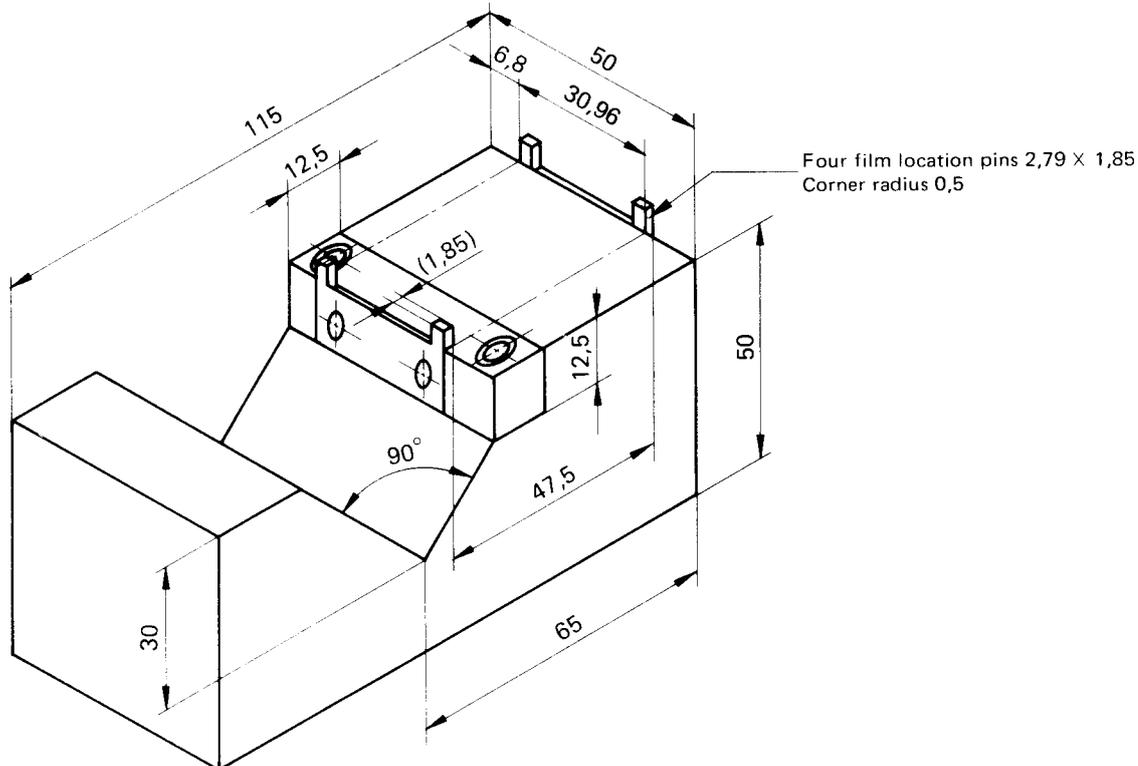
Gauging jig for measurement of film magazine dimensions relative to edge of film in 135-size film magazine
